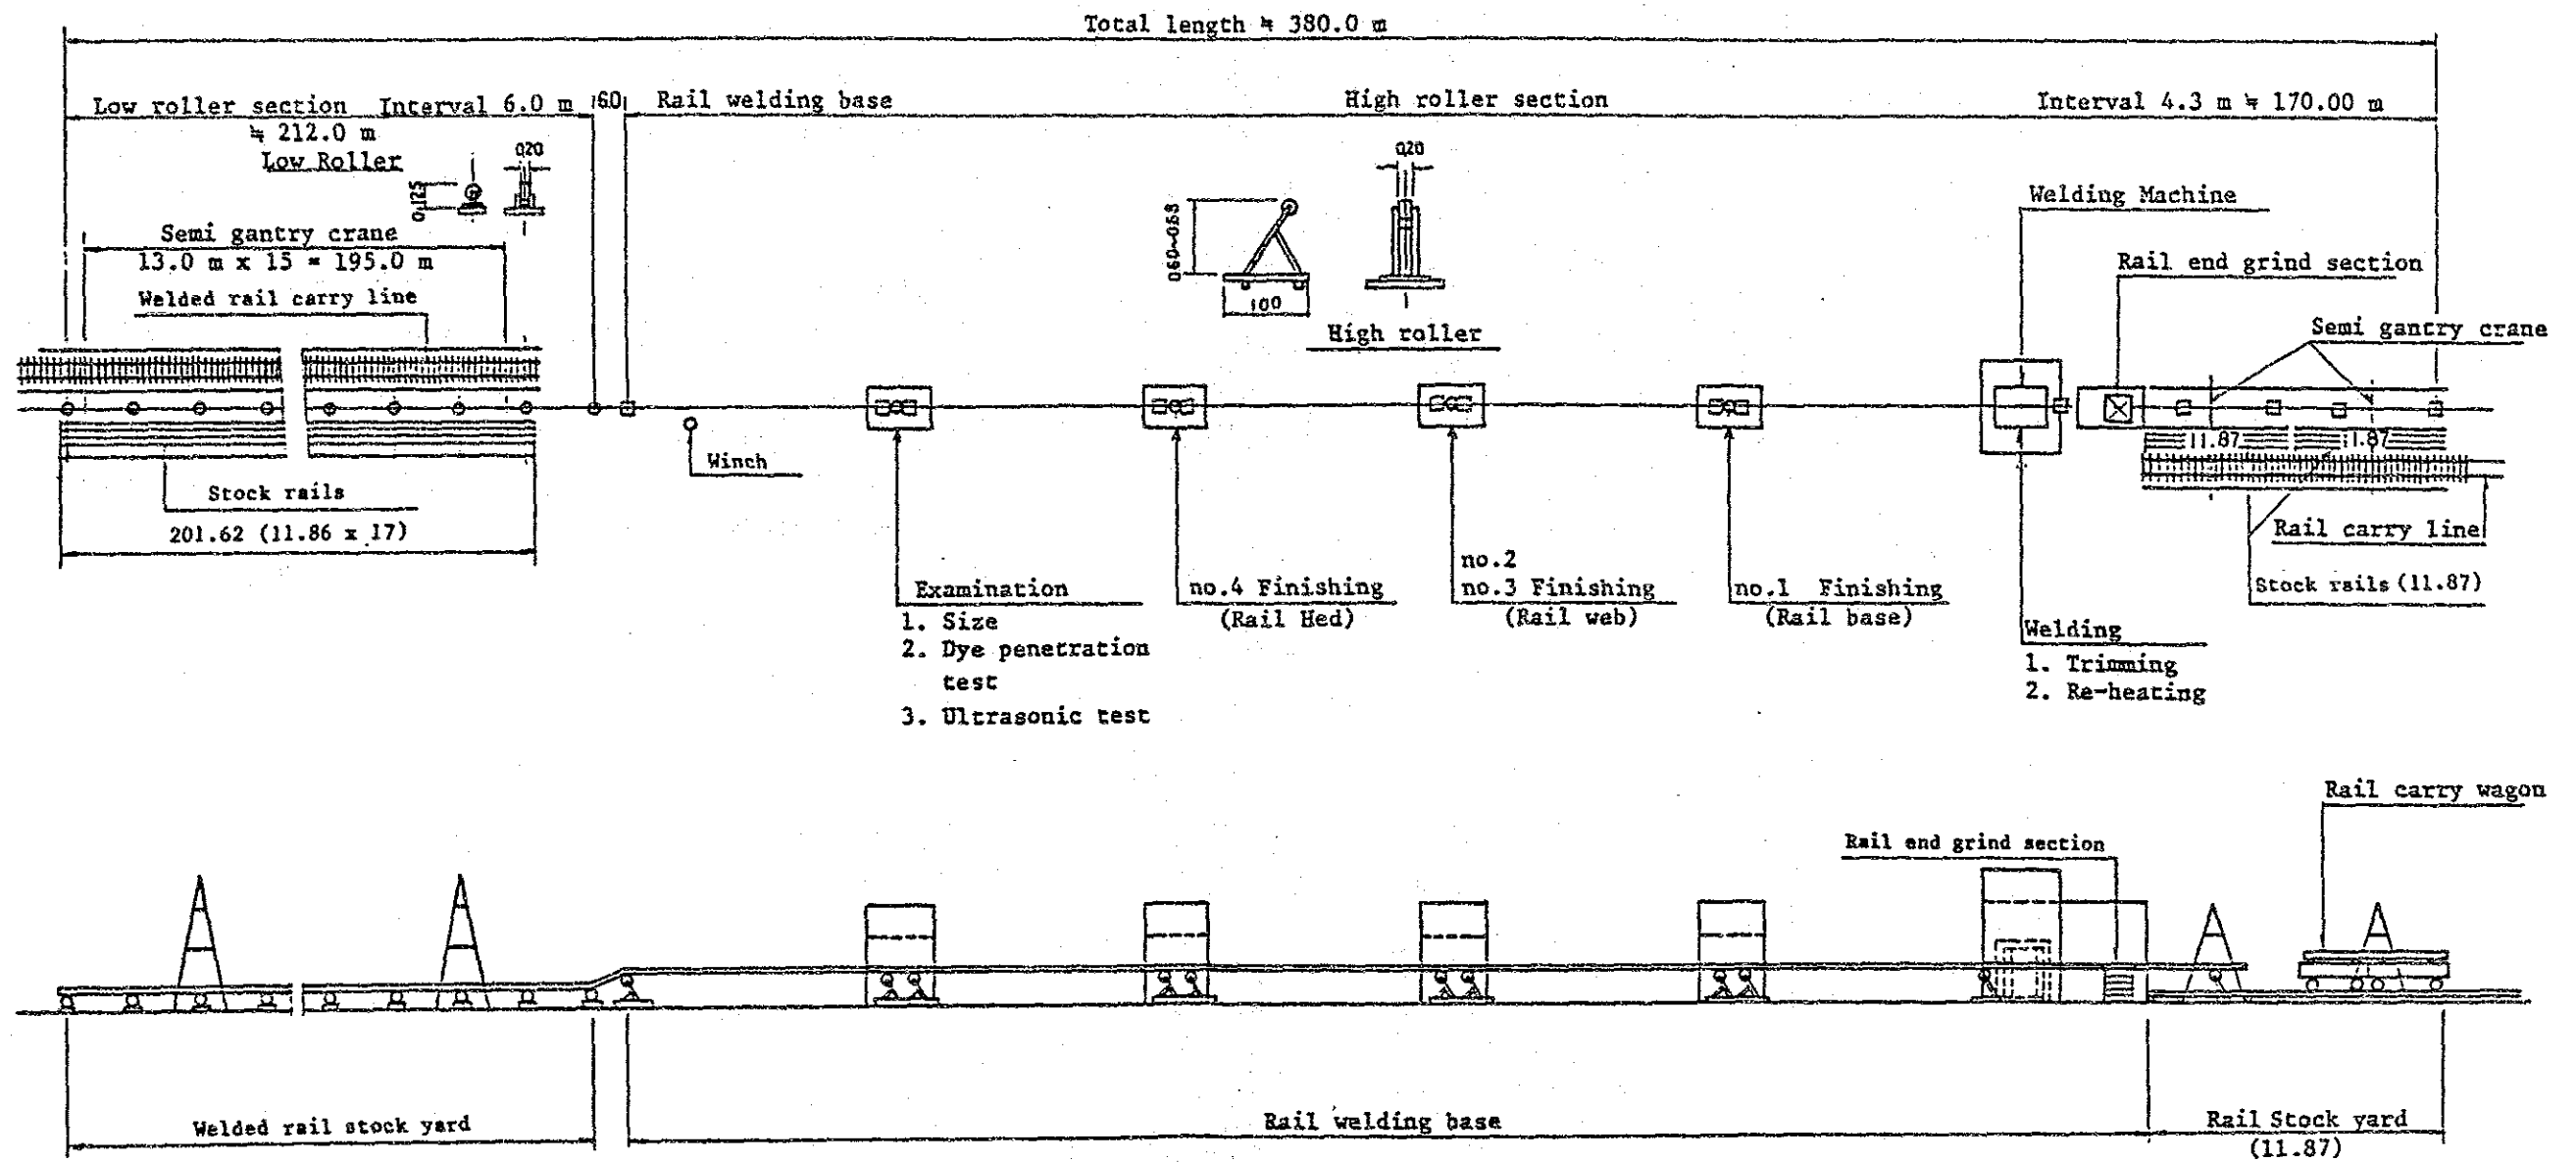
Typical Rail Welding Workshop
